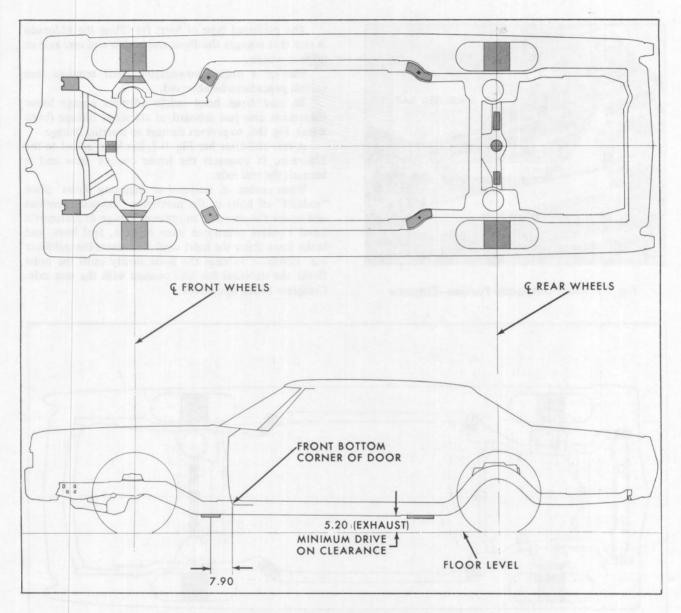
Lifting Locations—Except Eldorado and Commercial Chassis
